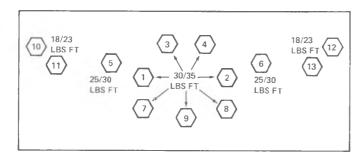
A-11--Cylinder Head To Exhaust Manifold Tightening Sequence
